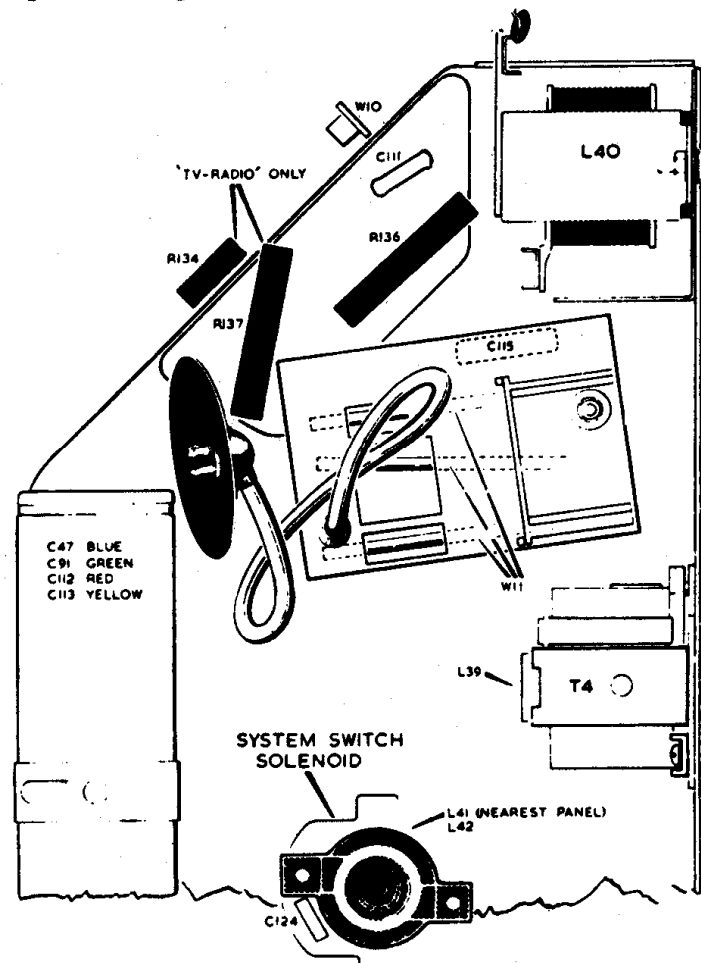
Right-hand side panel, 950 chassis, showing the position of the system switch solenoid.
